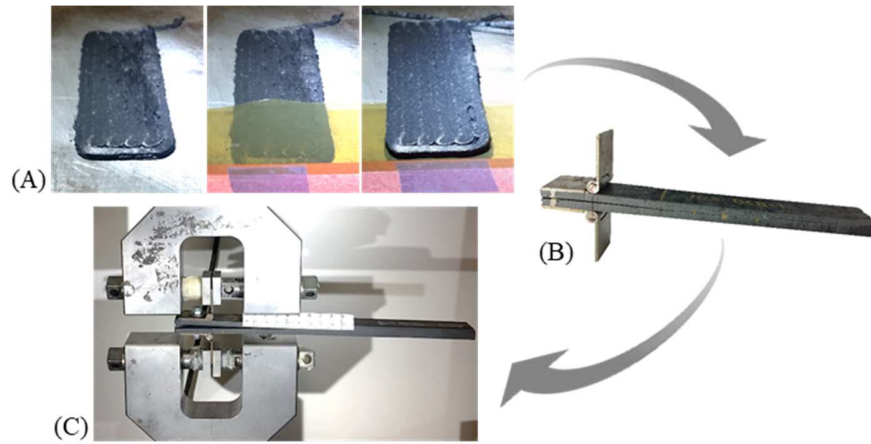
Preparation of DCB bonding experiments. (A) Process of printing panels with initial crack. (B) DCB prepared with piano hinges. (C) Fracture test of DCB.
